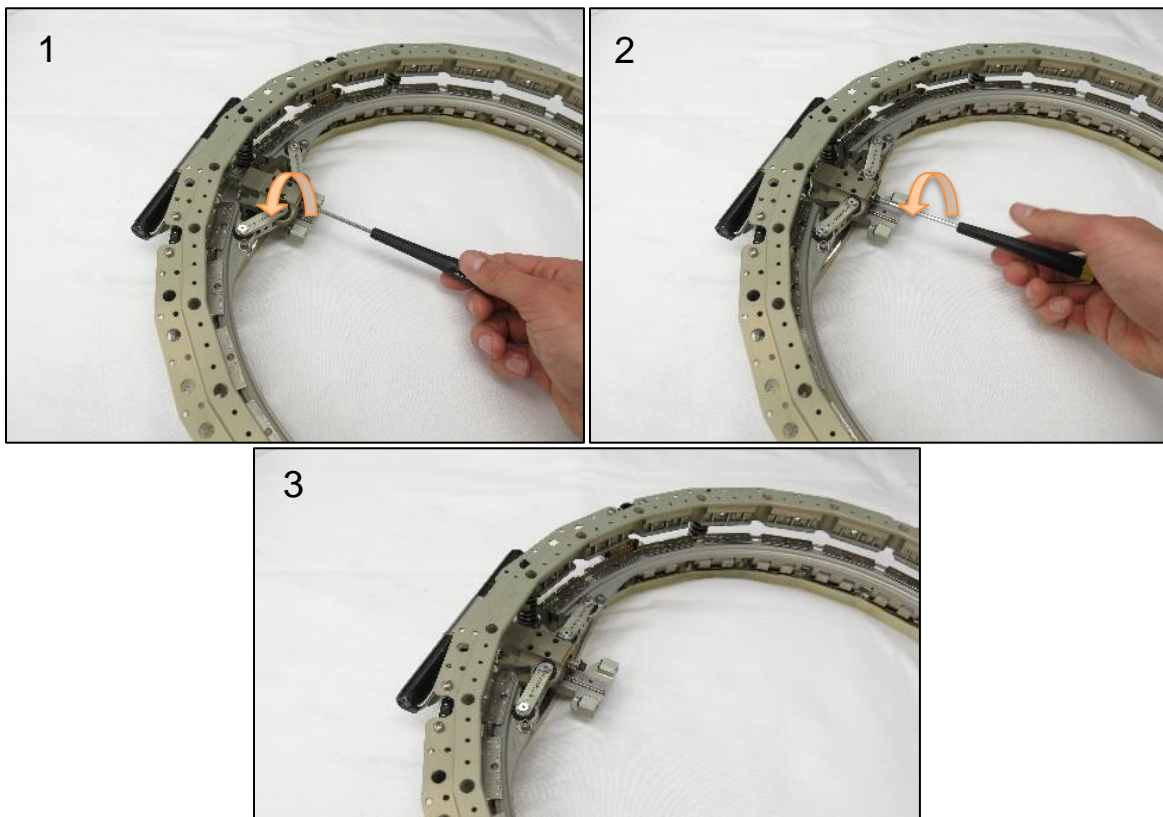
Manually rotating the Ball Screw until the Sliding Tube contacts the Motor Bracket
